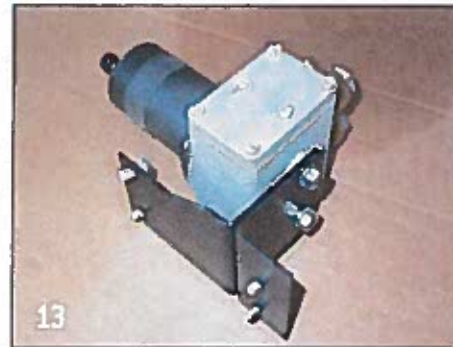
AUA 173 pump. Its "T" shaped bracket was mounted to the right heel board using 1/4 UNF x 1/2" long hex screws (nuts welded to cockpit side).
